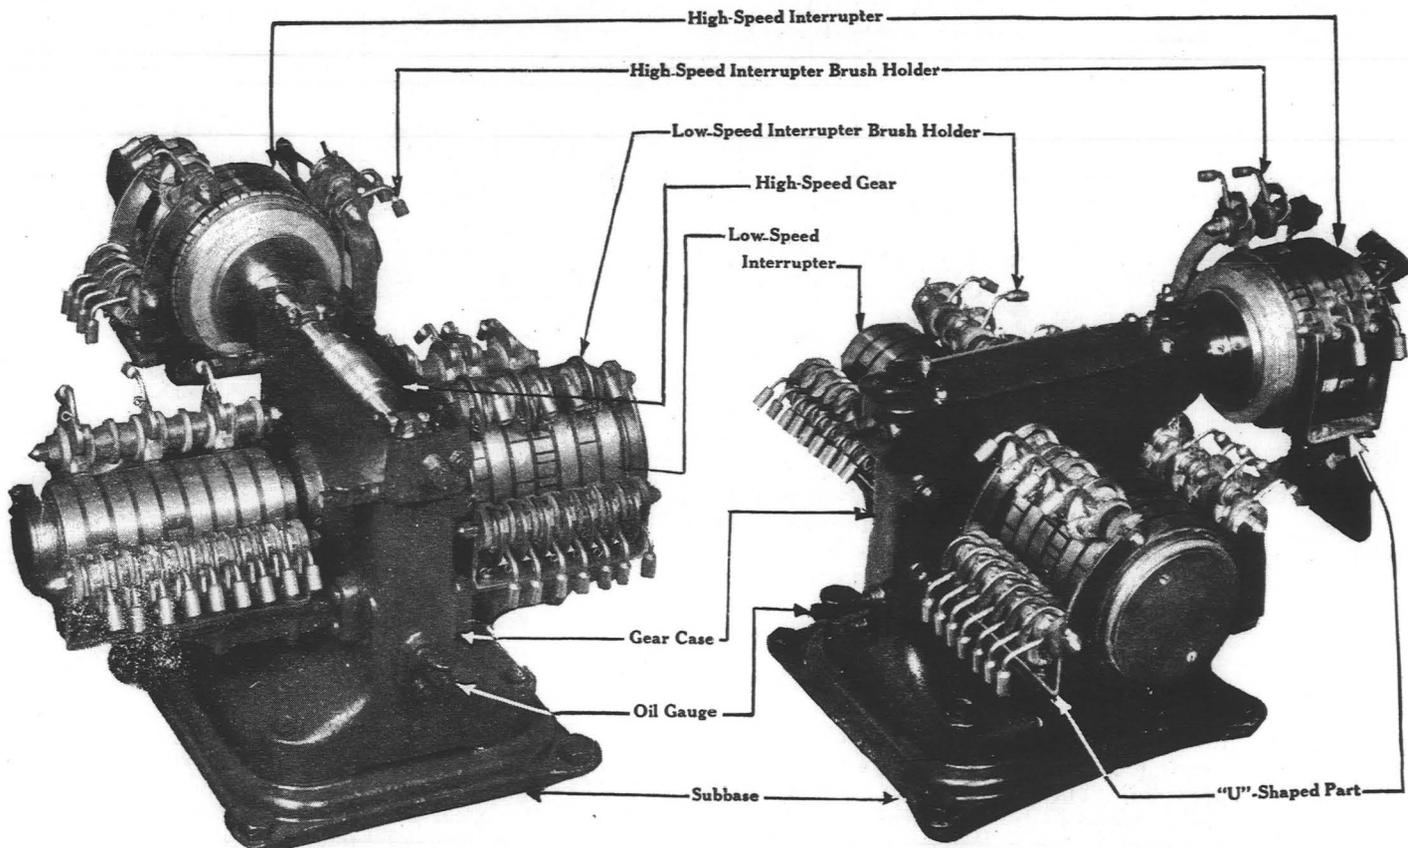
High and Low-Speed Interrupter Gear Case With Cover Removed.
